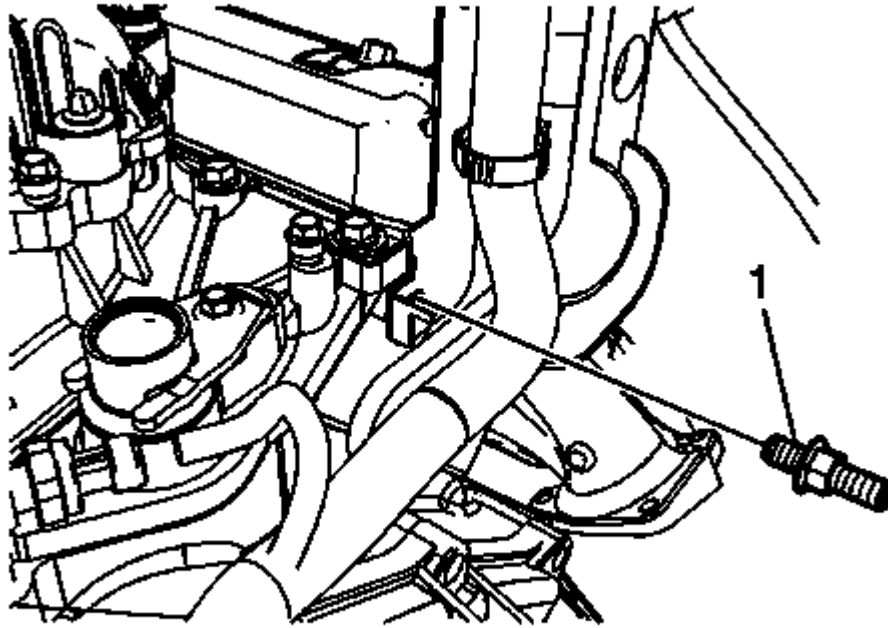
Locating Engine Wiring Harness Bracket Stud
